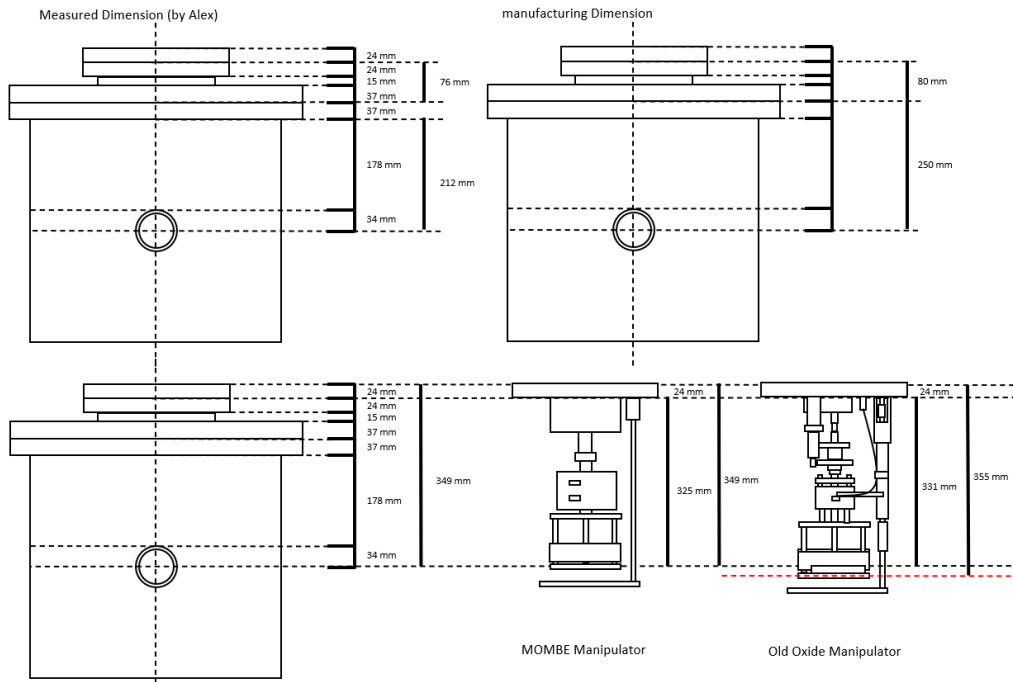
dimension of the MOMBE manipulator and the manufactured spec
